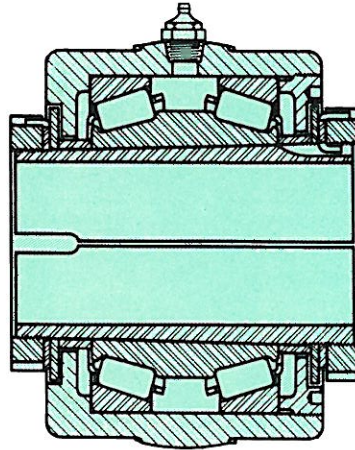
Section through a Spherical Unit. Note how the spherical ring will fit in either the straight bore of the Expansion Type Pillow Block Housing in Figure 7-1 or in the mating spherical ring bore of the Non-Expansion Type Pillow Block Housing in Figure 7-3.
